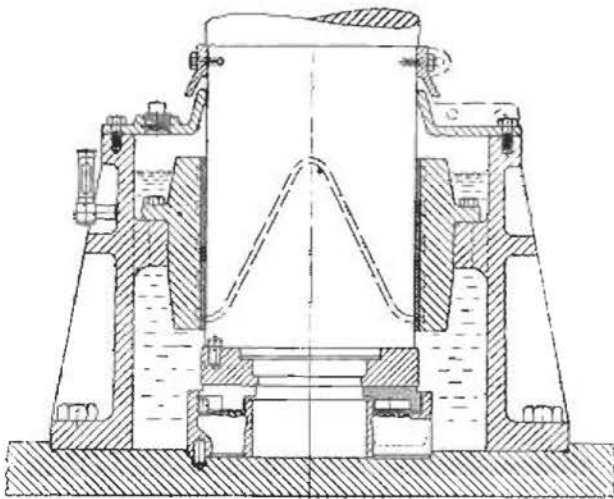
Kingsbury Thrust Bearing supporting end of heavy shaft. Bearing shown is Style KV or LV.
